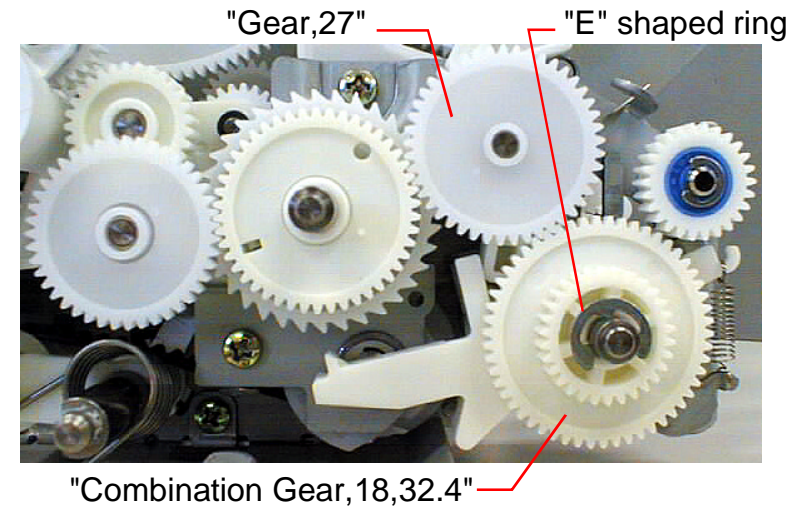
Installing the rest parts of "Frame Assembly, Middle, Right"(2)
